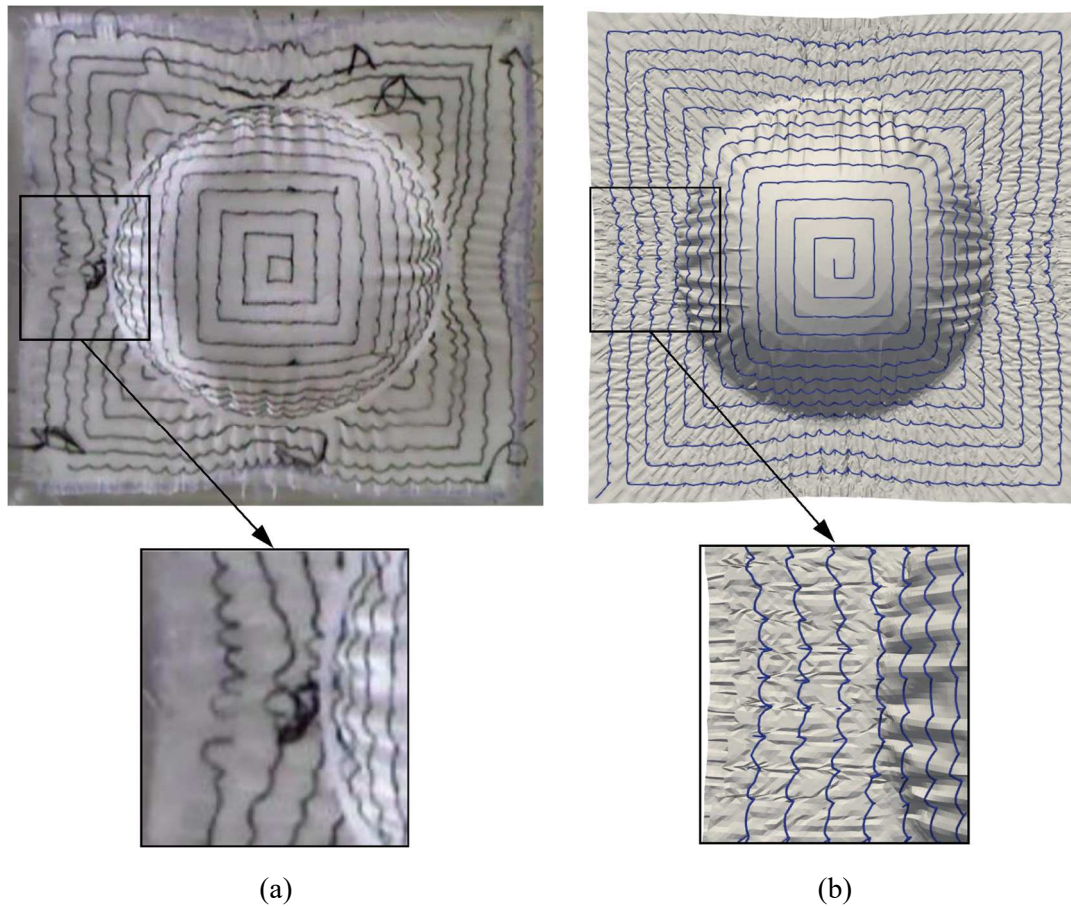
Deformed shape of the tufted preform and deformation of the in-plane tufting thread in experiment (a) [16] and simulation (b).
